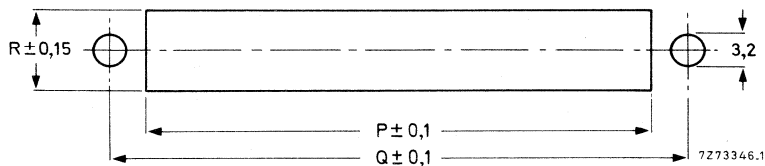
Piercing diagram for panel mounting; see Table 2 for dimensions P, Q and R.
